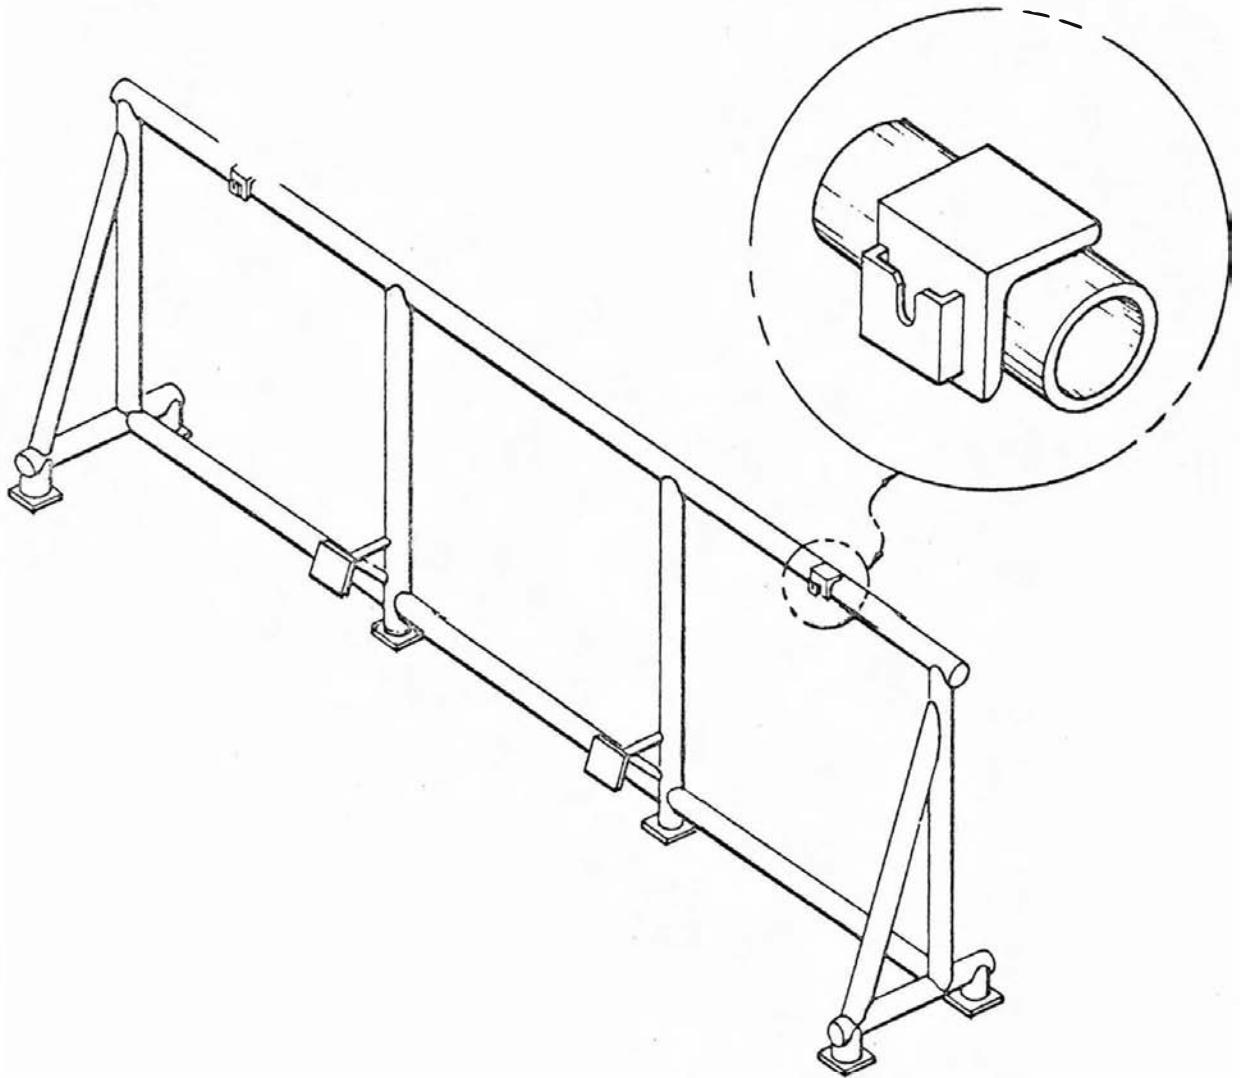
Skin Panel Assemblies Holding Fixture HF-335-18100
